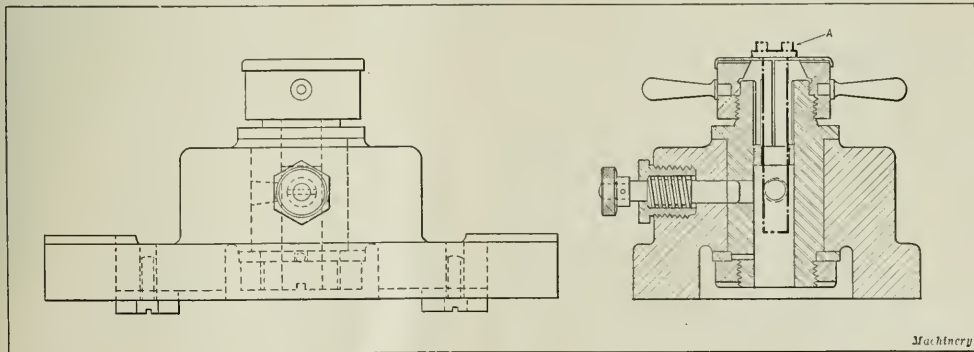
Fixture used in milling Cross-slots in Bolt Head
